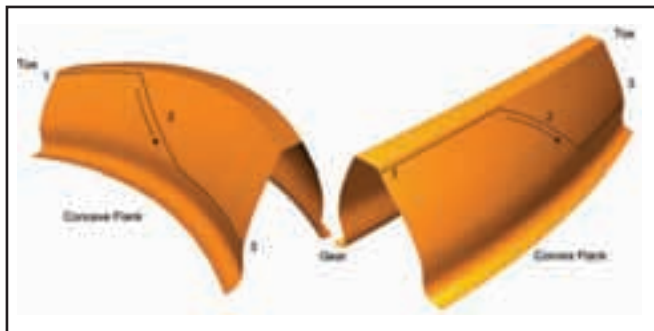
With the pinion assembled too close to the ring gear, the contact will be pushed deeper into the ring gear teeth and higher on the pinion teeth.
